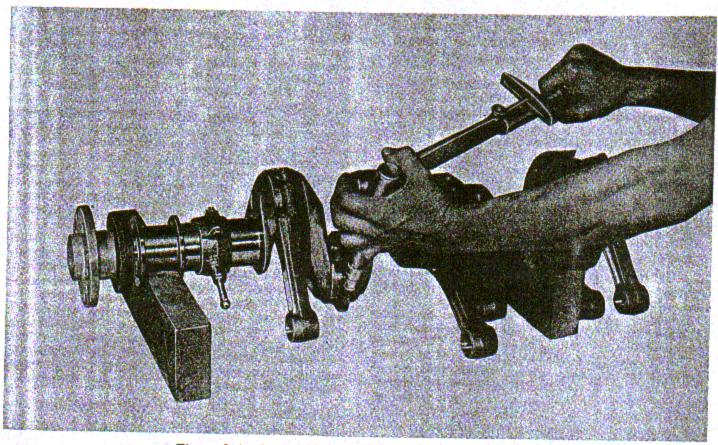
Tightening Connecting Rod Cap Bolt Nut
